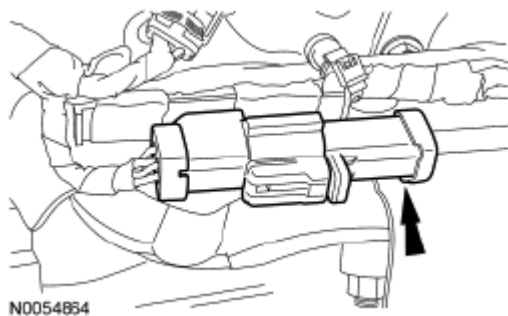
Locating RH Heated Oxygen Sensor (HO2S) Electrical Connector
